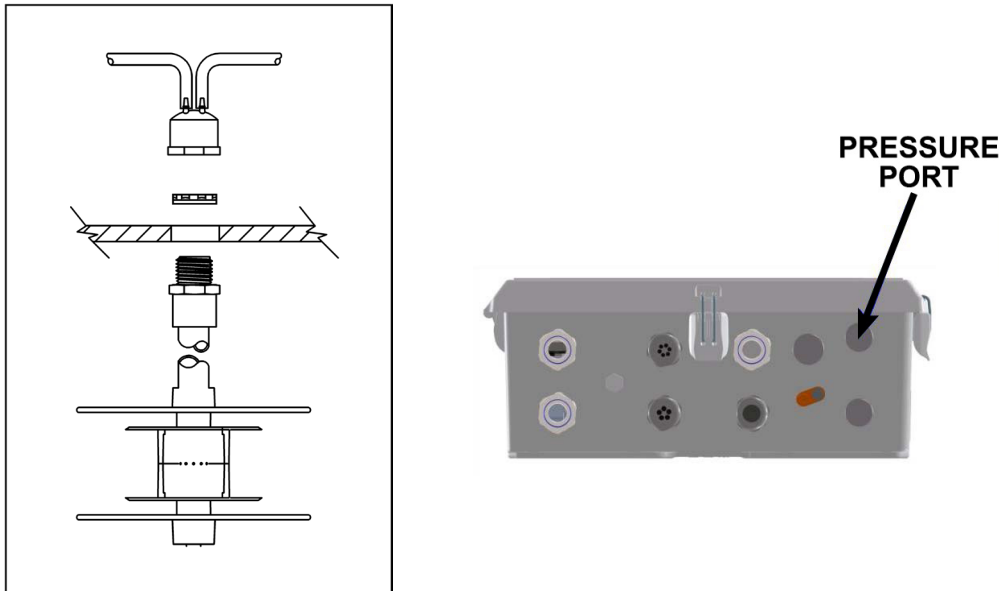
Install Pressure Port at Bottom of DCP Enclosure
